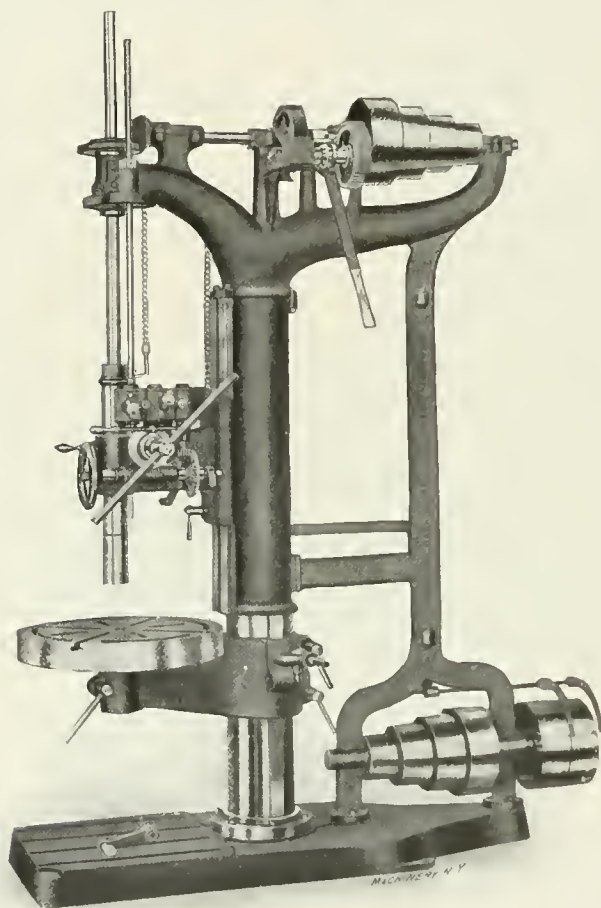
Drilling Machine built by the Superior Machine Tool Co.
